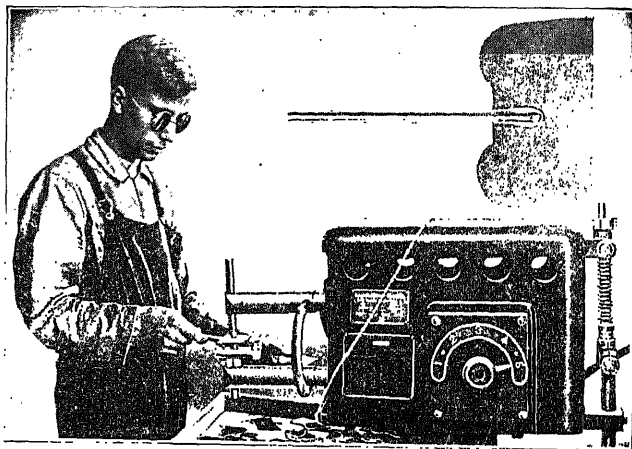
Welding Small Hoe Blades to the Shanks.
